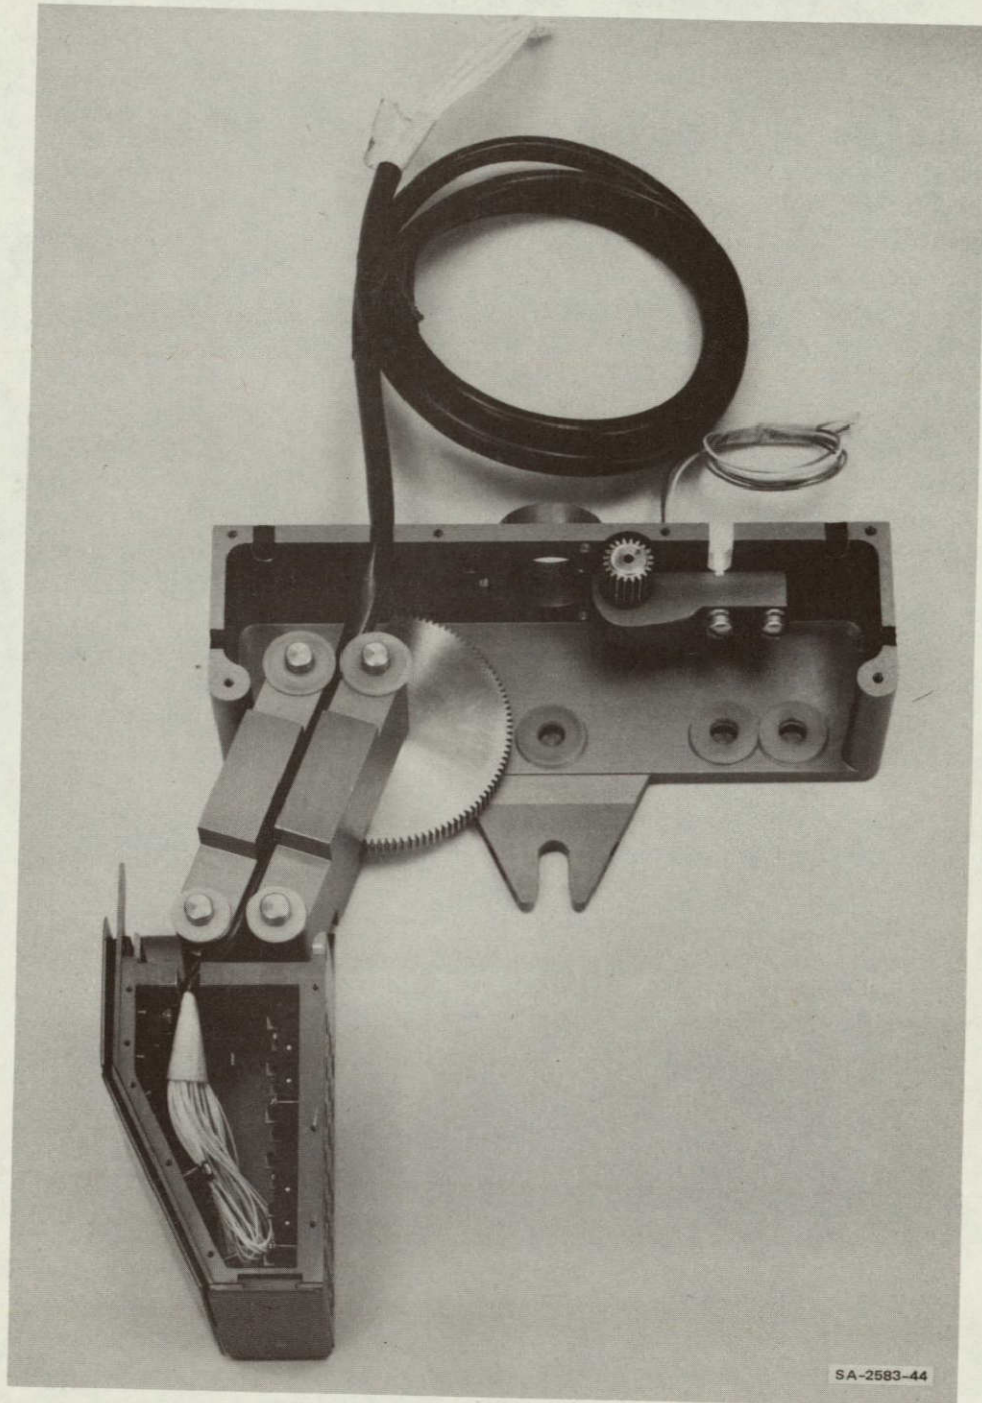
ASSEMBLY OF JAW INTO DRIVE TRAIN HOUSING
